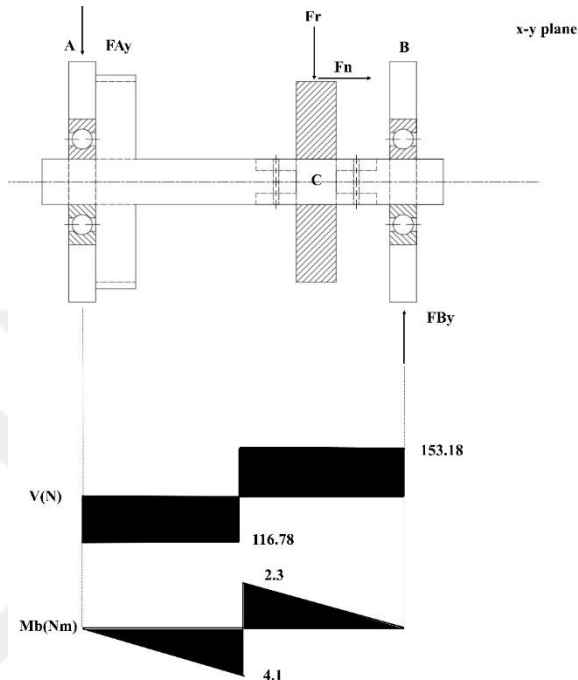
Technical Drawing of the Main Shaft with Shear and Moment Diagram
